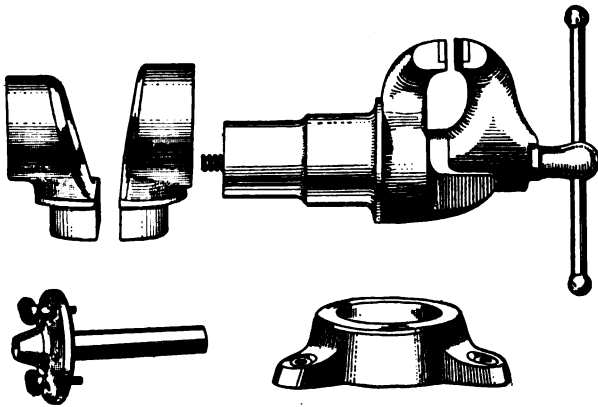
SHOWING MECHANICAL PARTS OF VISE.
